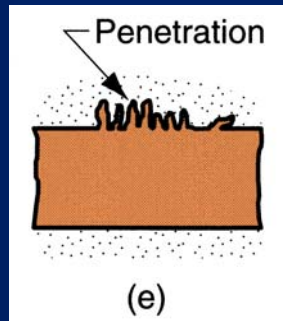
Common defects in sand castings: (e) penetration
